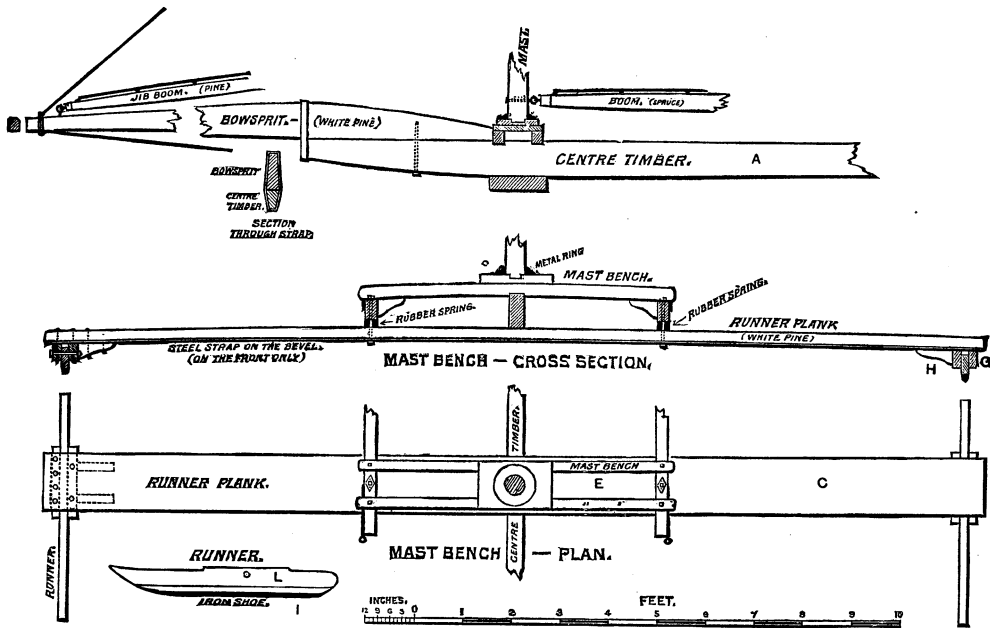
PLAN AND ELEVATION OF MAST-BENCH AND RUNNER-PLANK.
